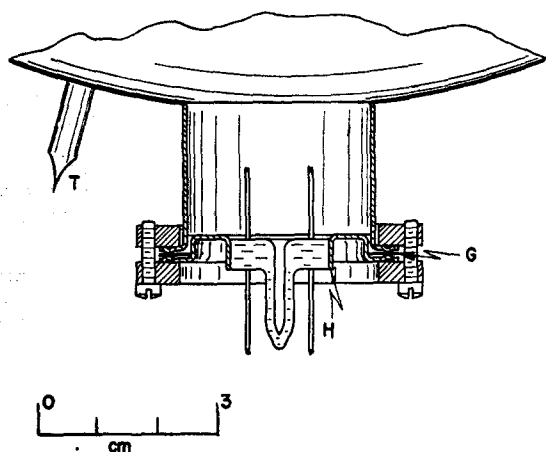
The copper gasket *G* makes a vacuum- or pressure-tight seal between the plated steel convolutes when pressed together by means of the clamping rings. The header *H* is a commercial radio-tube part (6L6) that has 8 conductors passing through the glass button. The copper tubulation *T* is sealed against pressure or vacuum by the pinch-off tool shown in Fig. 2.
